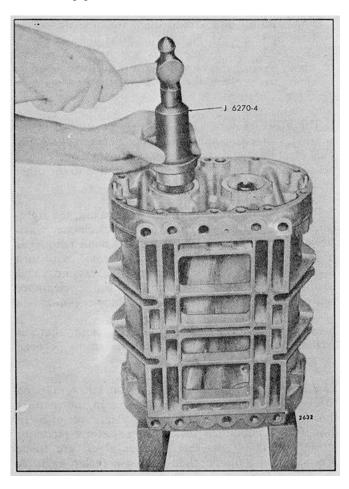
Installing Roller Bearings on Rotor Shafts and in Front End Plate
